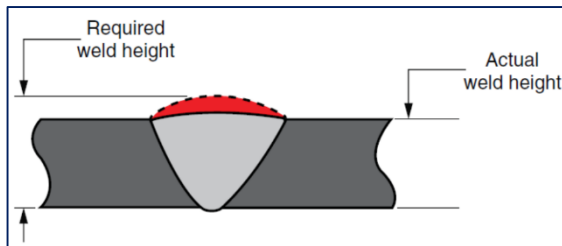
A Groove Weld crown with Insufficient Height [111]
